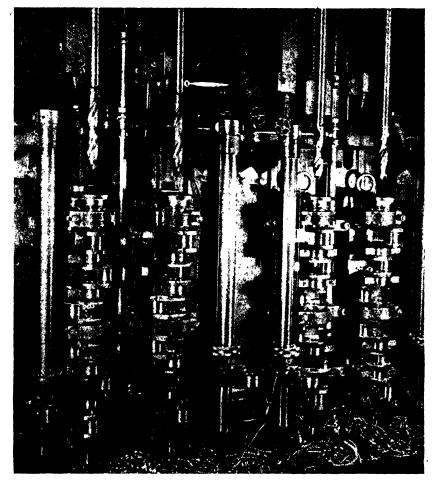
Vertical crankshaft-drilling machine with photo-electric automatic control
